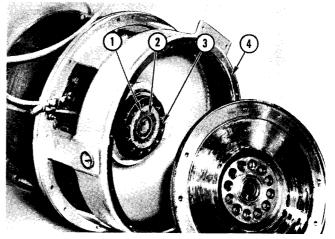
GENERATOR ADAPTOR AND LOCKNUT 1. Setscrew 3. Adaptor 2. Locknut 4. End Bell
